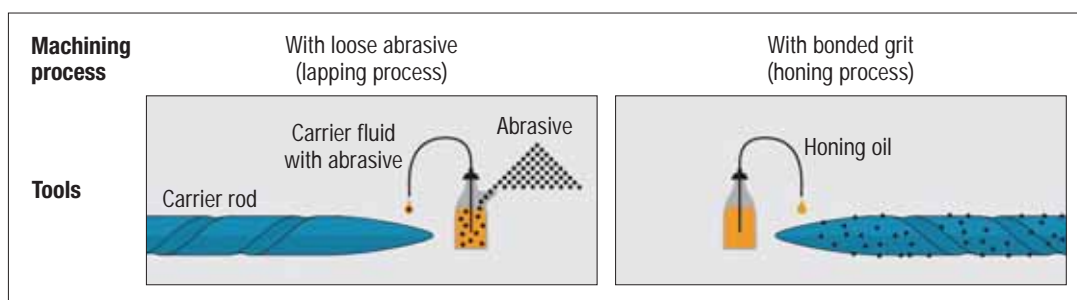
Graphic representation of the Micro Bore Sizing machining processes and tools
